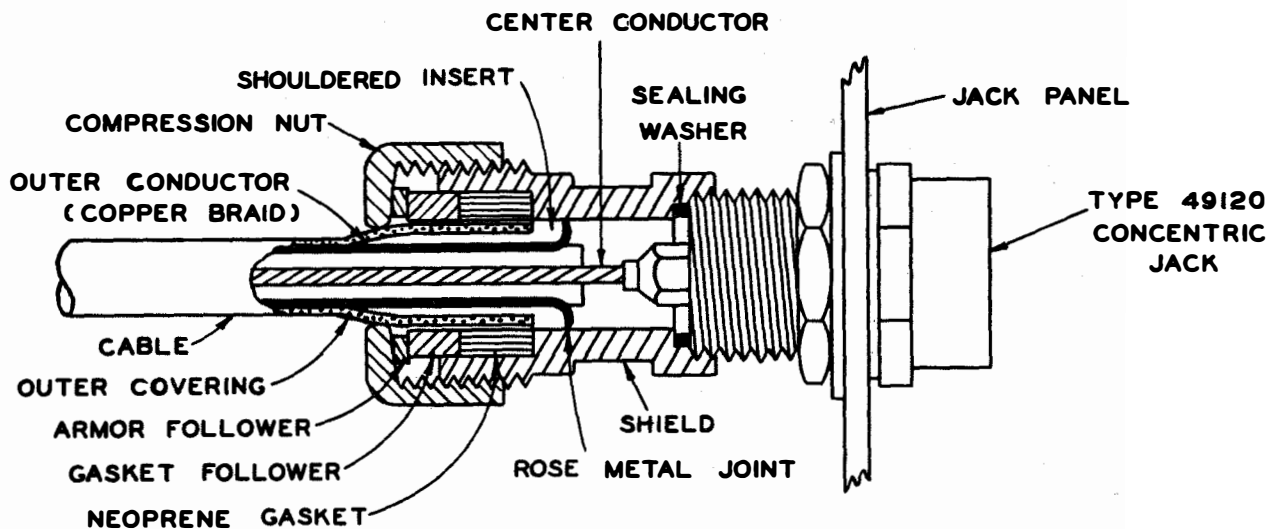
Coaxial Jack Termination Assembly Detail, Cross-Sectional View
